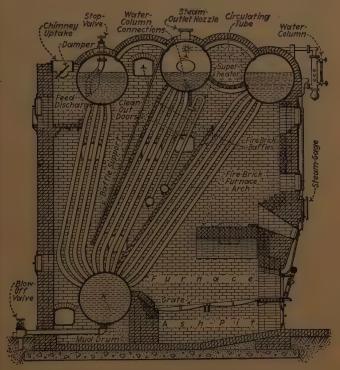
Sectional side elevation of Stirling water-tube boiler.
